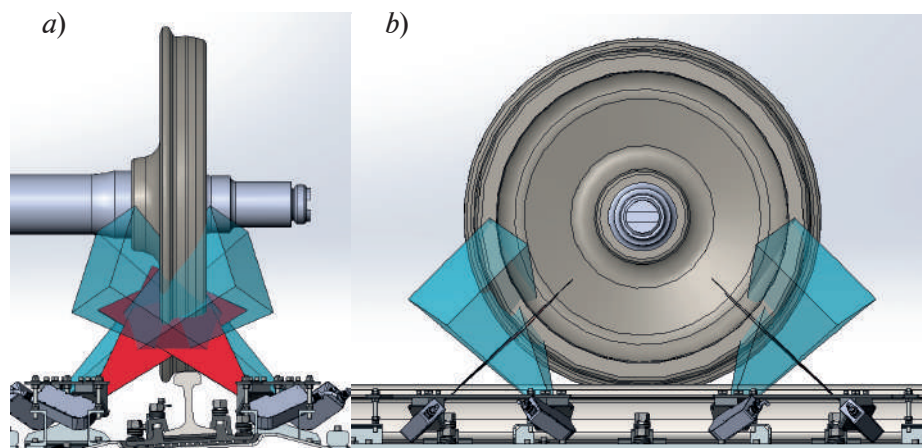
The process of irradiating the wheel with profilometers side view (a), front view (b)
